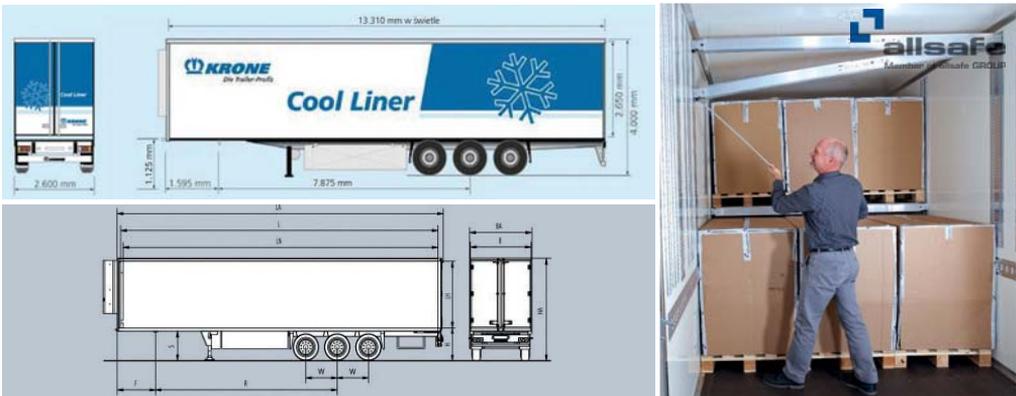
Dimensions of Krone Cool Liner cooling semi-trailer with ATD II system
